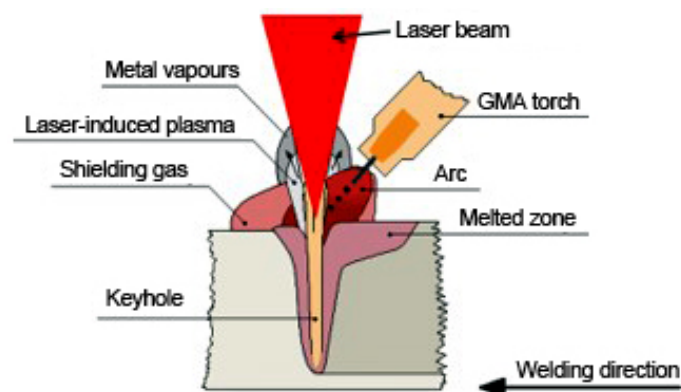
Schematic diagram of hybrid laser welding (laser + GMA) [1]
